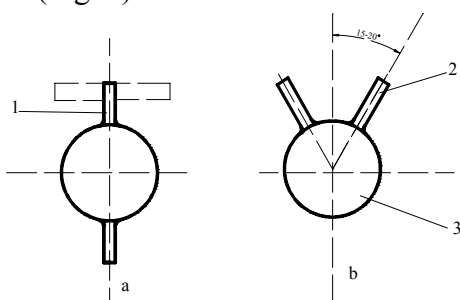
Solutions to increase tubes' self - support: a - metallic profile welding; b - welding two sheet metal ribs (1 - metallic profile; 2 - rib; 3 - tube)
